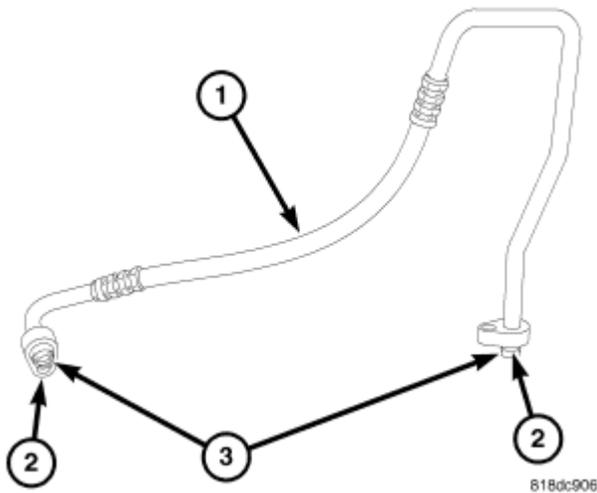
A/C Discharge Line, Metal Gaskets & Rubber O-Ring Seals
